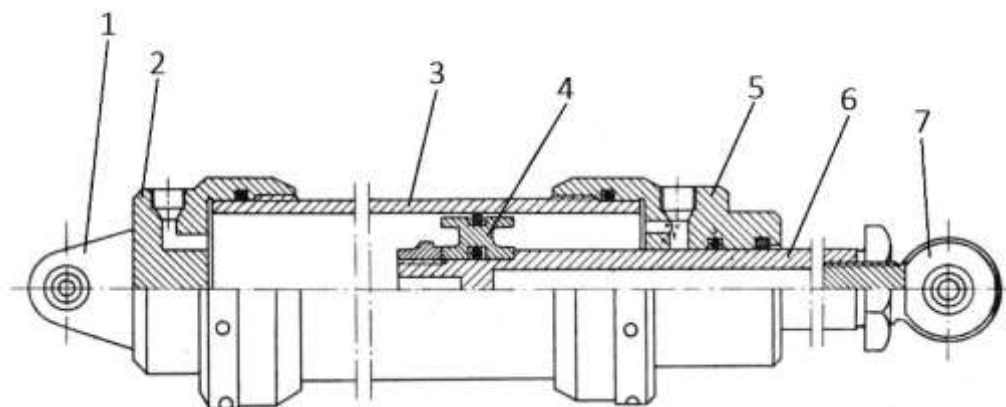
Parts of a hydraulic cylinder: 1 – base mounting, 2 – base, 3 – barrel, 4 – piston, 5 – head, 6 – piston rod, 7 – rod mounting (Lipski 1981)
